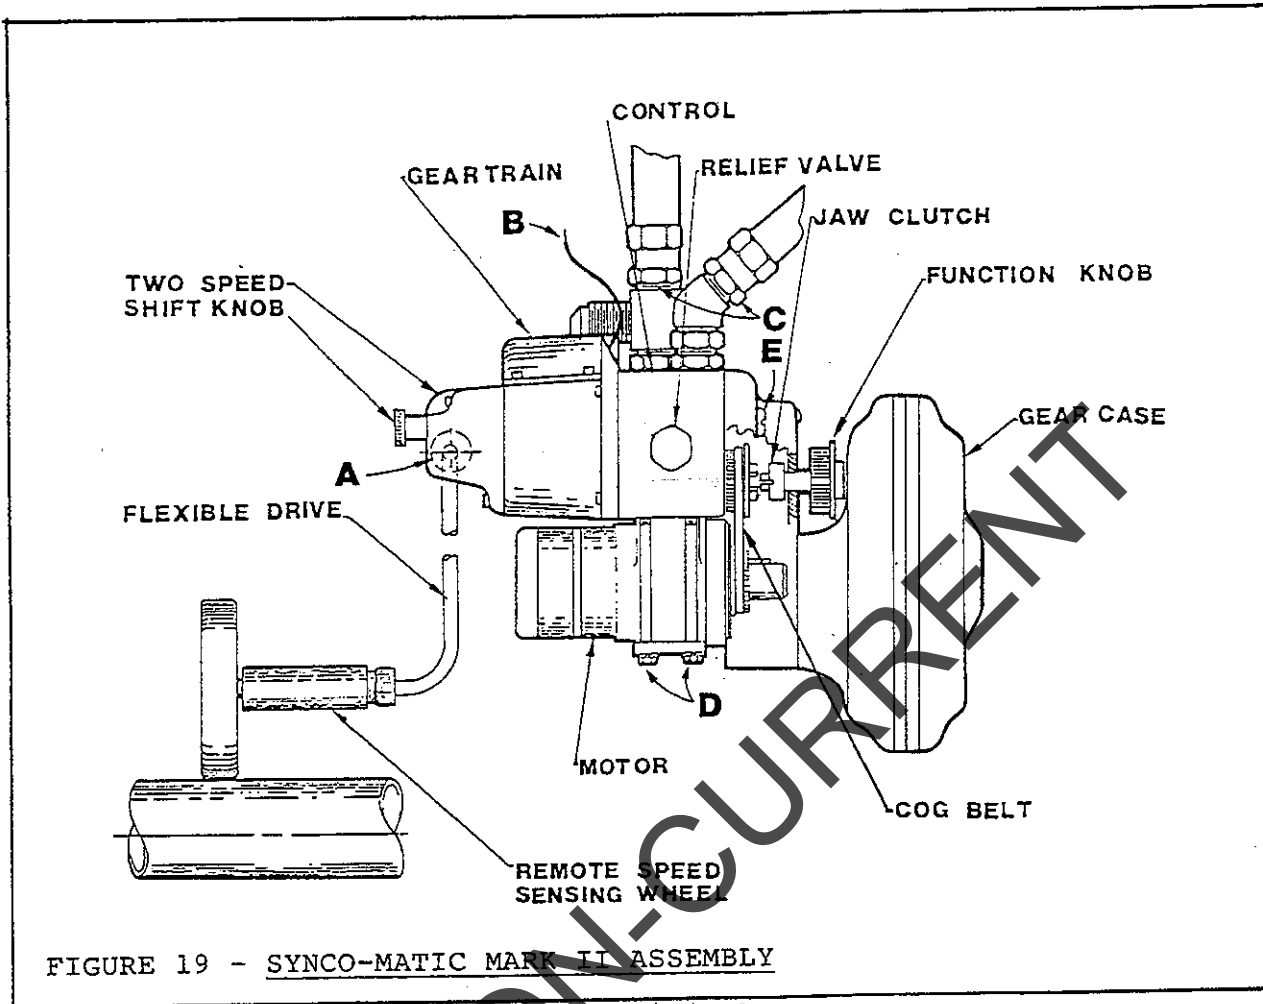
SYNCO-MATIC MARK II ASSEMBLY
